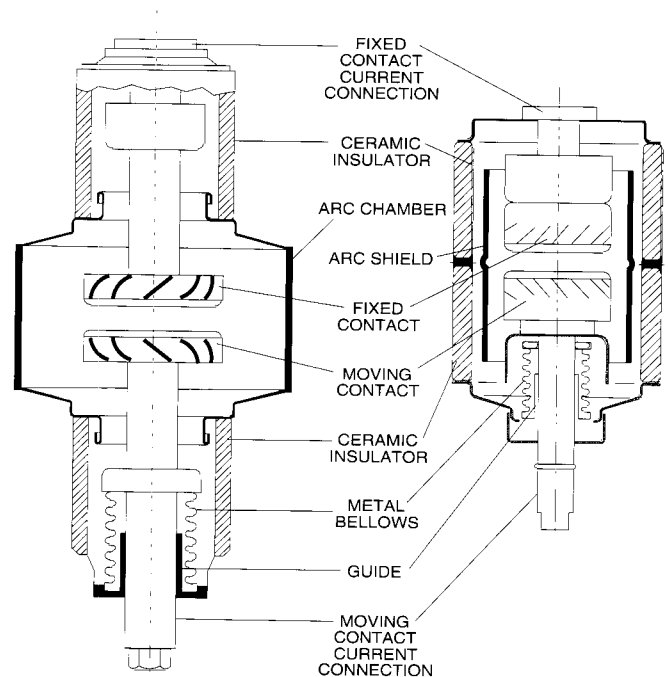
Cutaway View of GMI Vacuum Interrupters.
